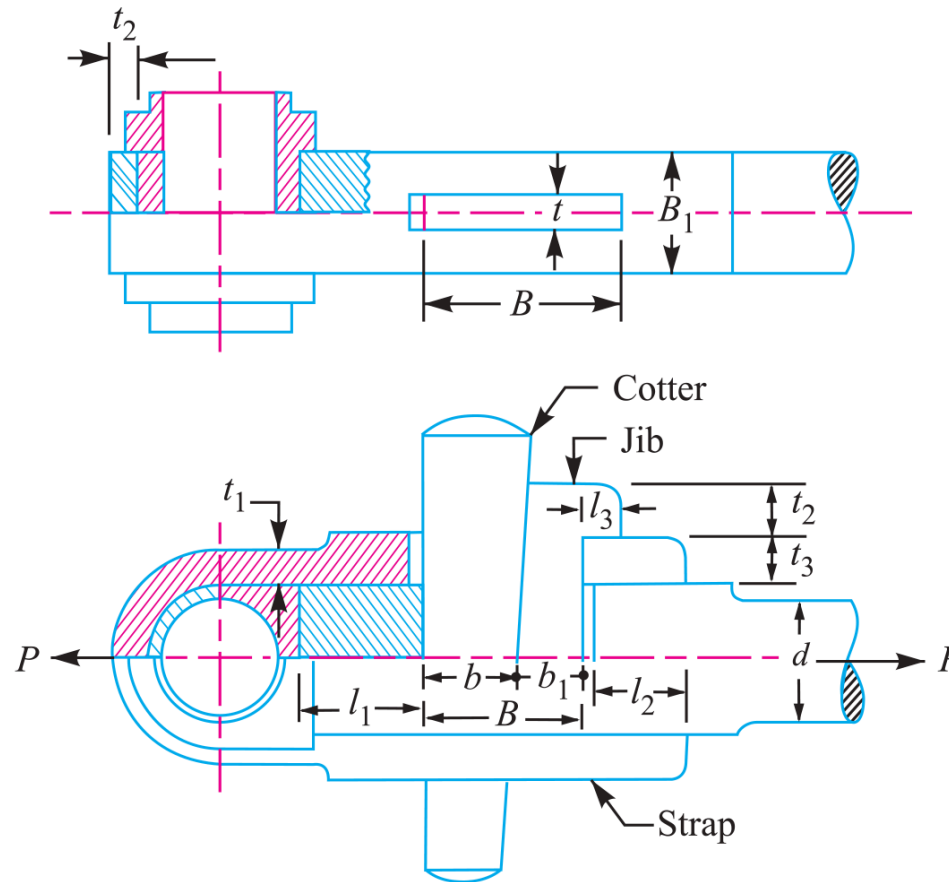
Gib and cotter joint for strap end of a connecting rod.
